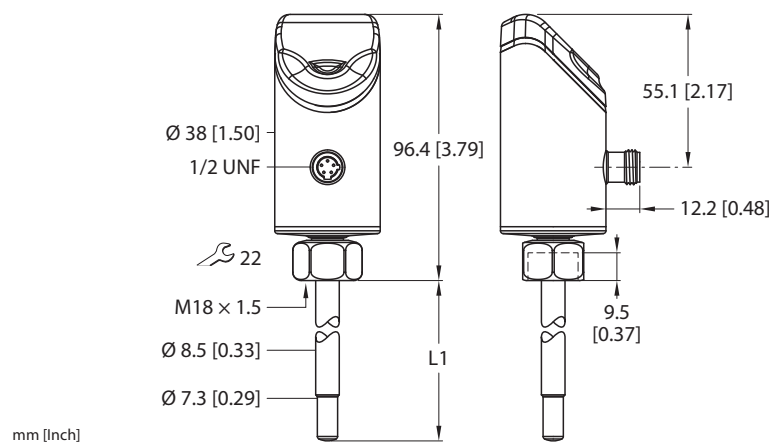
Dimensions — sensor with 1/2" UNF connector without screw-in adapter
